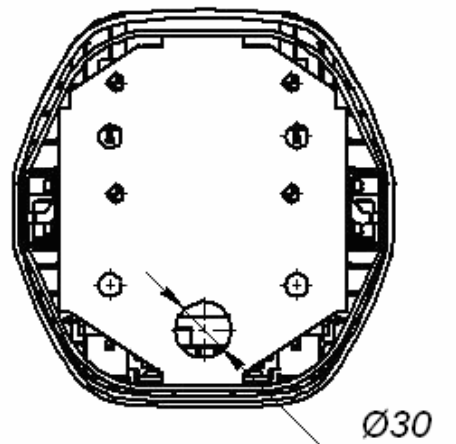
Floor anchor position and cable entries (A) for IC-03.1 housing installation
